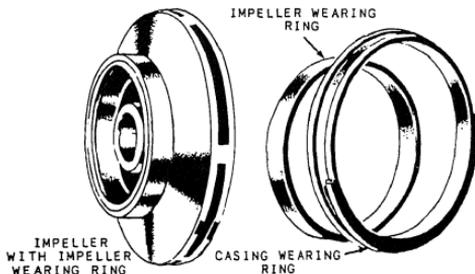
Impeller, impeller wearing ring, and casing wearing ring for a centrifugal pump.
